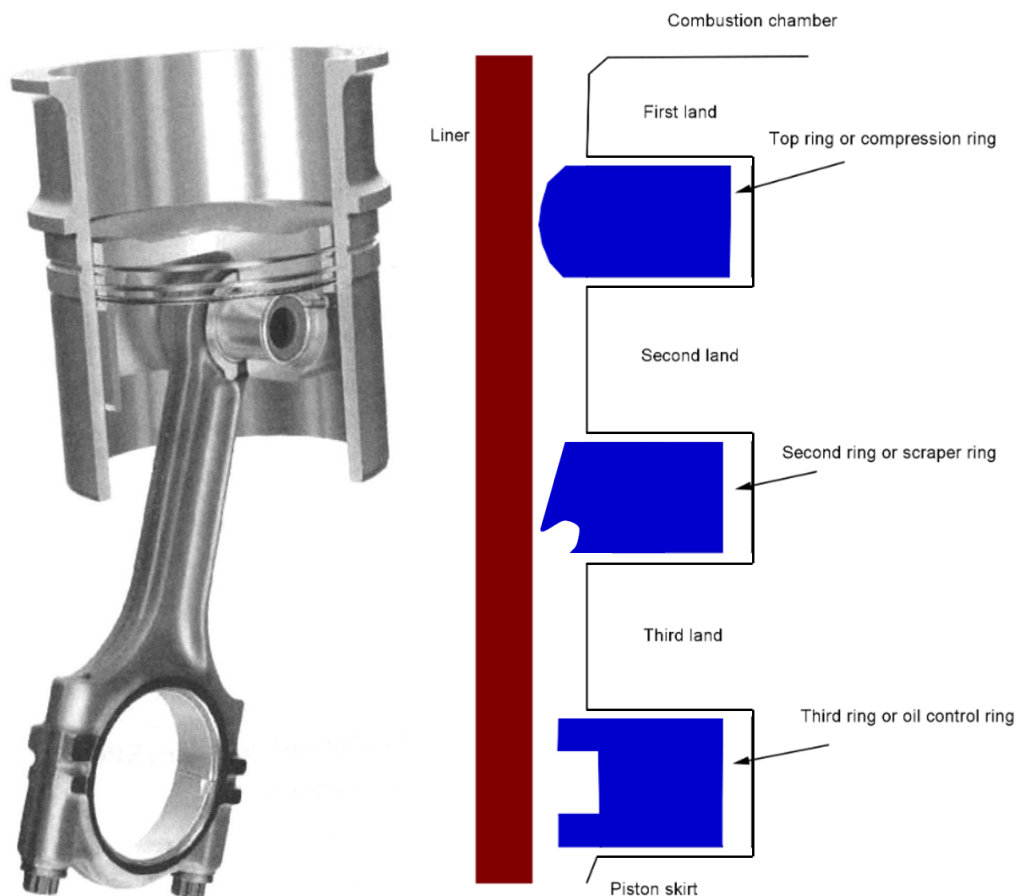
Piston pack [5] (left: global view - right: piston rings and liner)
